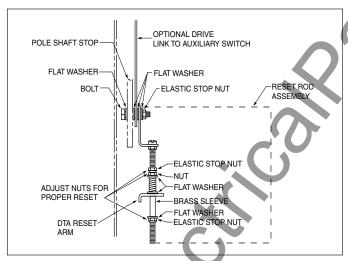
Correct Connection of the Reset Rod Assembly and the Auxiliary Switch Drive Link
